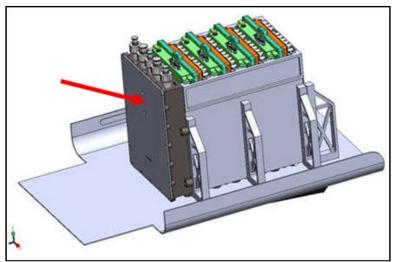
MAIM Installed on Jump-20 MP Payload Tray
